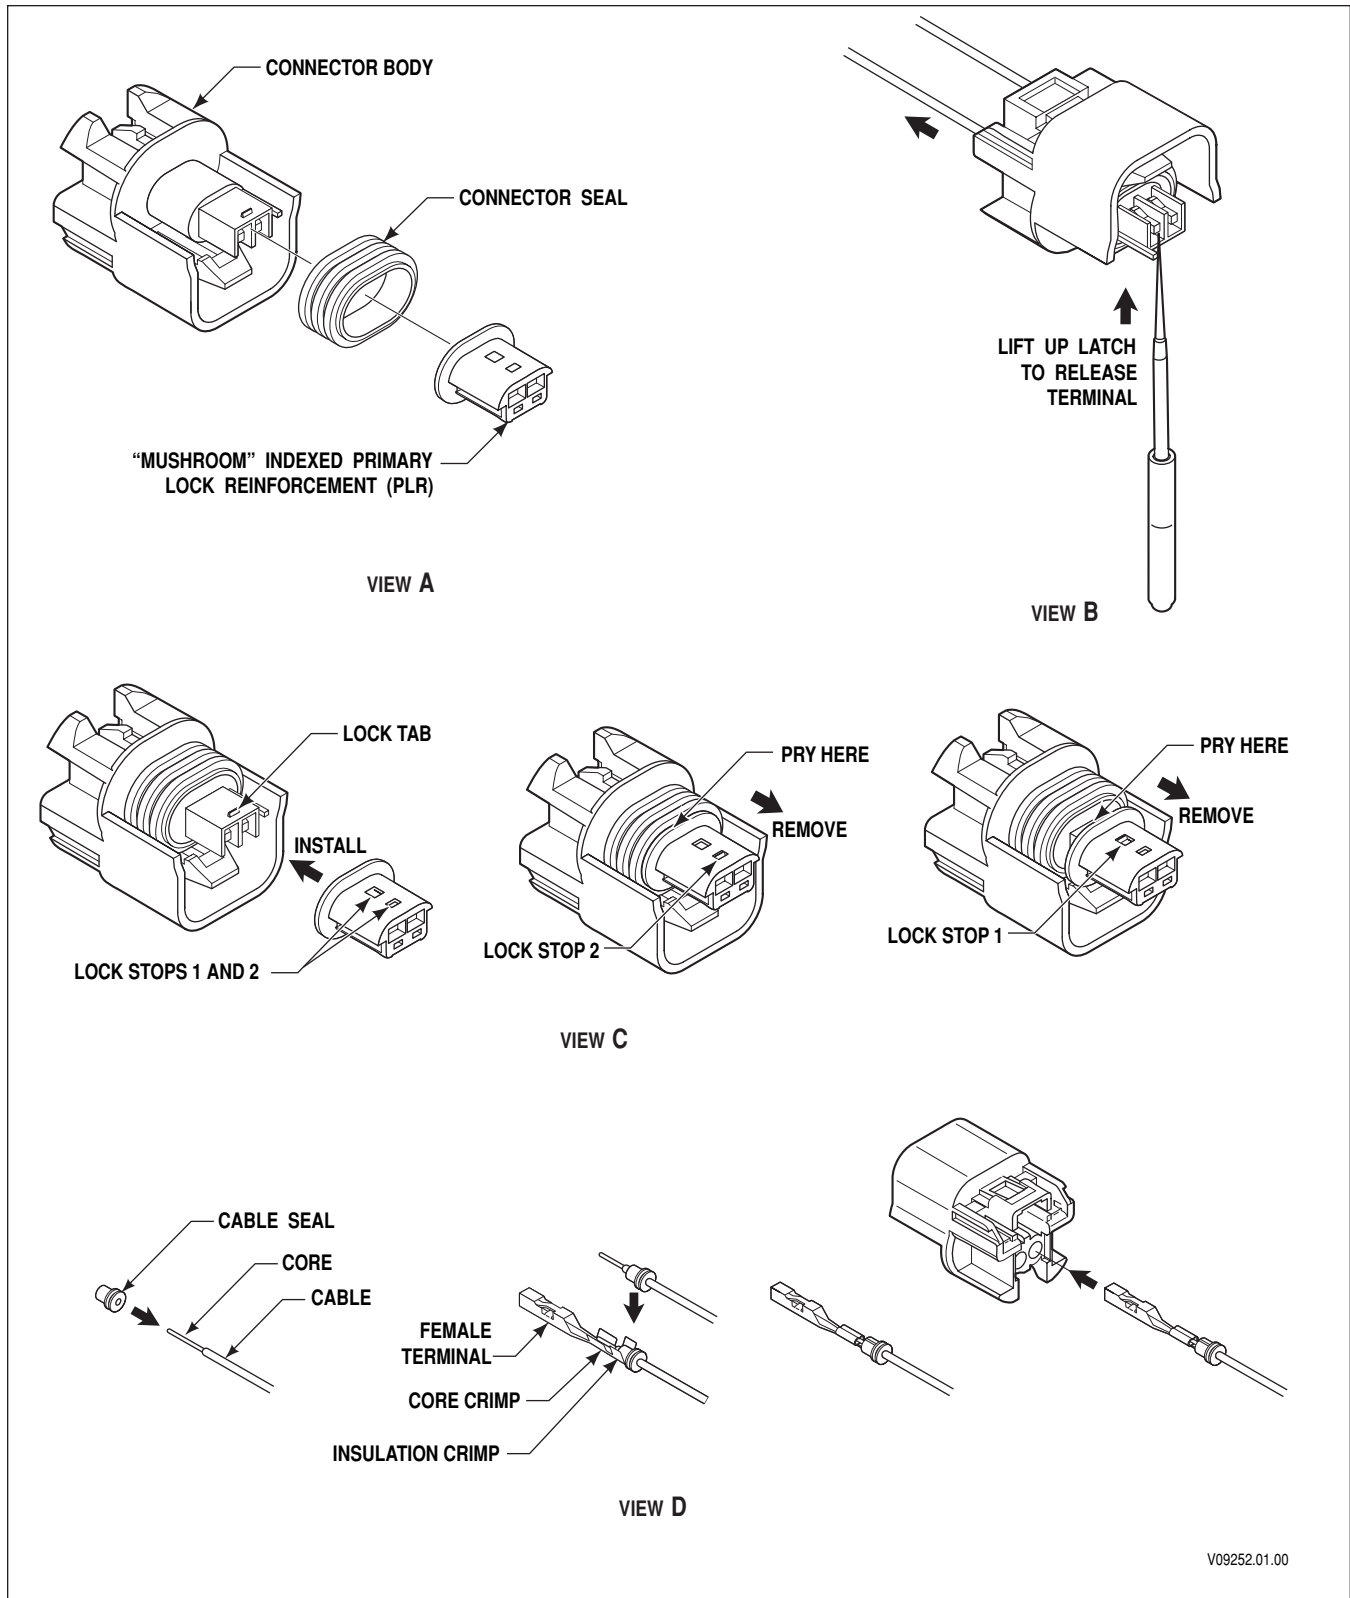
B. Delphi-Packard GT 150 Series Connectors—Push-to-Seat (Speed Sensors)
